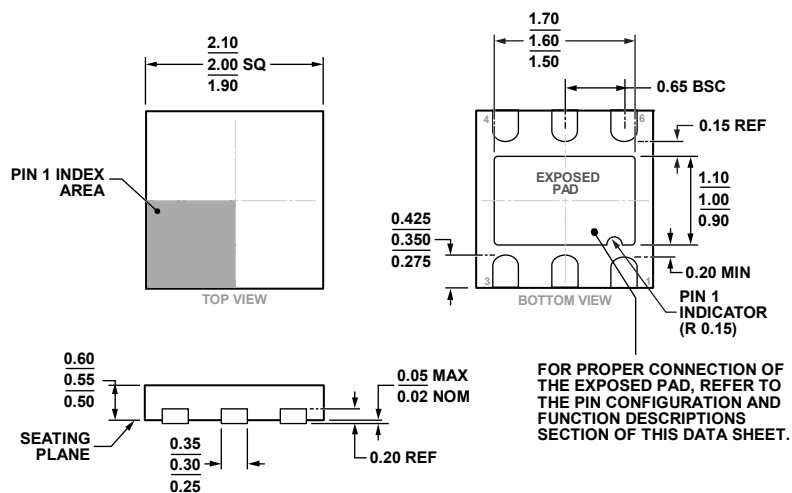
6-Lead Lead Frame Chip Scale Package [LFCSP_UD]
